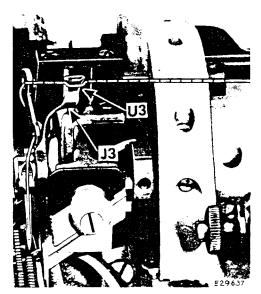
Needle Thread Controller 164151 in Correct Relation to Needle Thread
